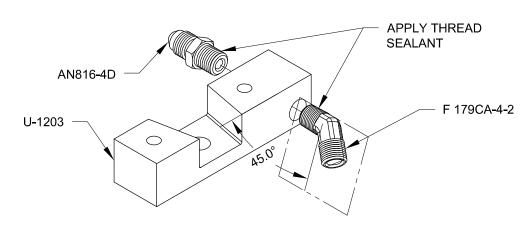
INBOARD MAIN GEAR ATTACH BRACKET FITTINGS
